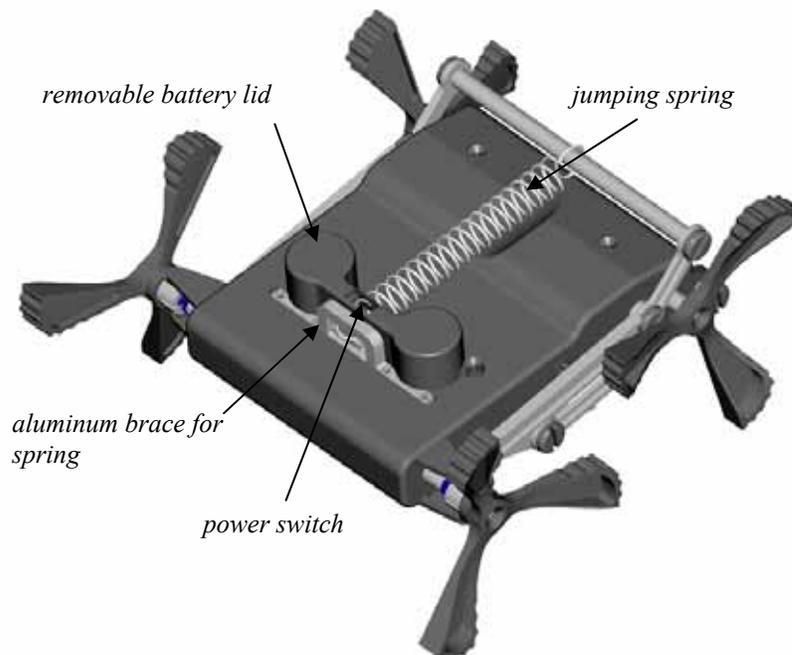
Rendering of the complete robot. The jumping spring attaches to a brace in front of the batteries and fits underneath the removable battery lid.
